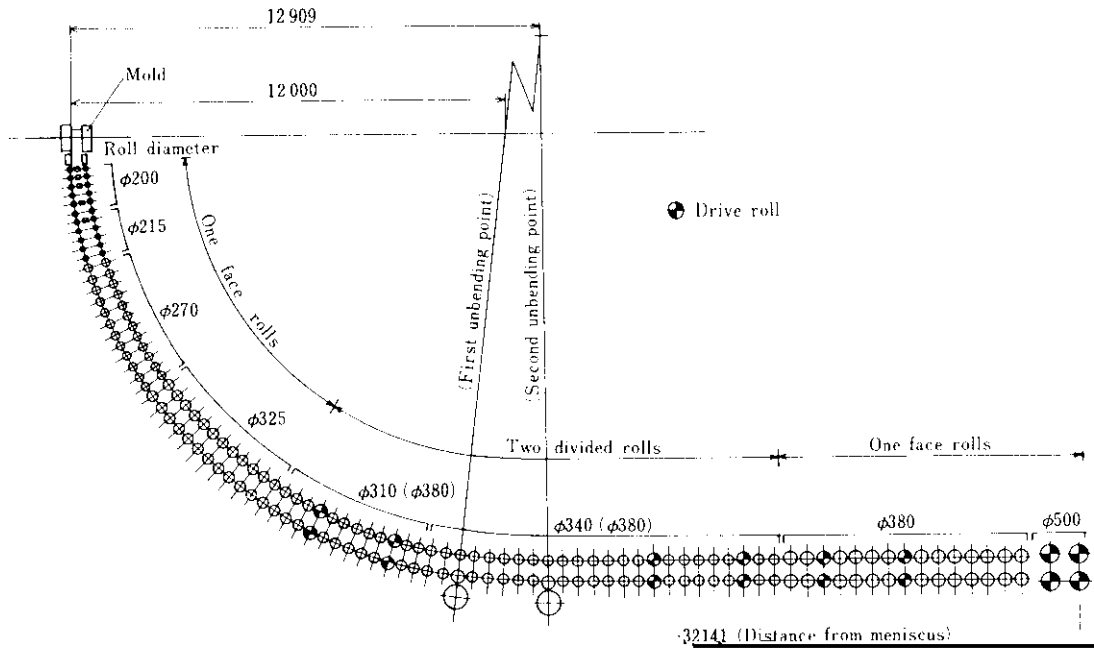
Plan layout of No. 5 continuous casting machine in Mizushima Works
